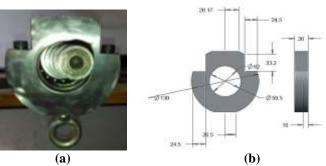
(a) Photographic view of Test bearing housing (b) 2D drawing of Test bearing Housing
